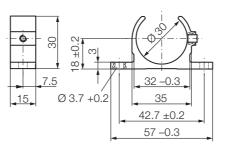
Mounting bracket BTL6-A-MF01-A-43
